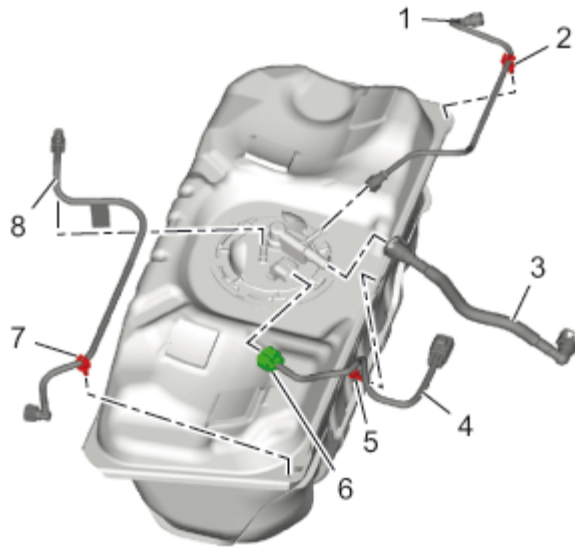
Fuel Pump Feed Hose, Evaporative Emission Canister Hose, Evaporative Emission Rear Hose, Electrical Connector, Fuel Pump Module Wiring Harness And Retainers
